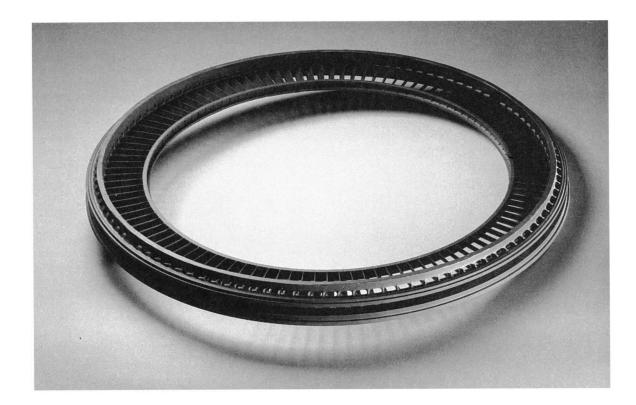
9 A one-piece compressor stator with 108 separate airfoils made by investment casting (photo courtesy of Howmet Corp.).
